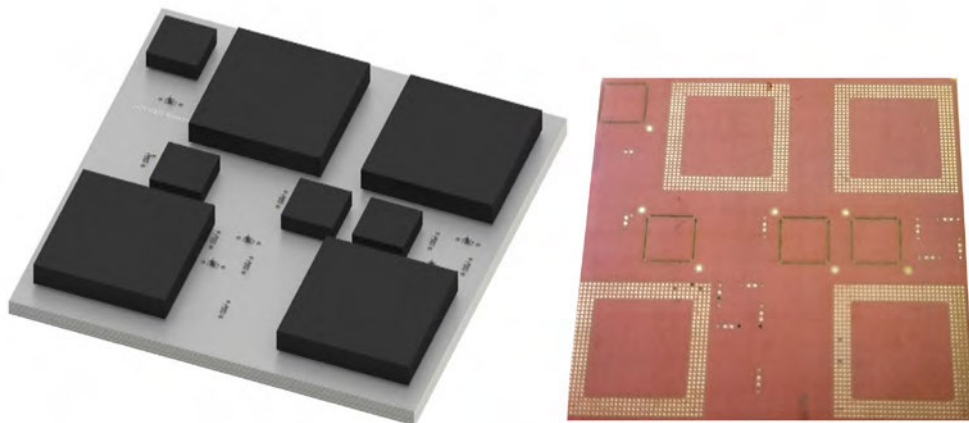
10-layer LCP substrate PCB with hybrid SMT assembly and flip chip die attach.
